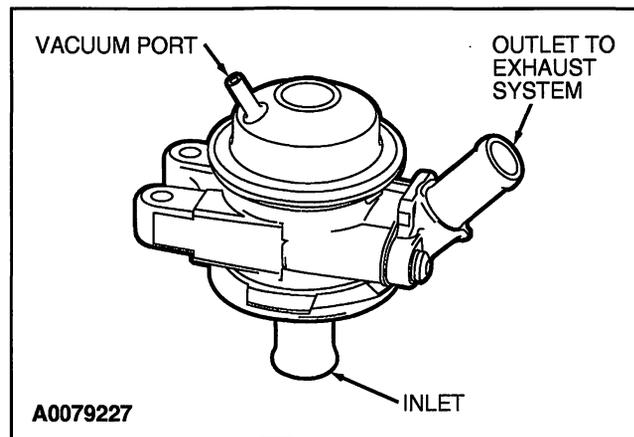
Air Injection Diverter (AIR Diverter) Valve
